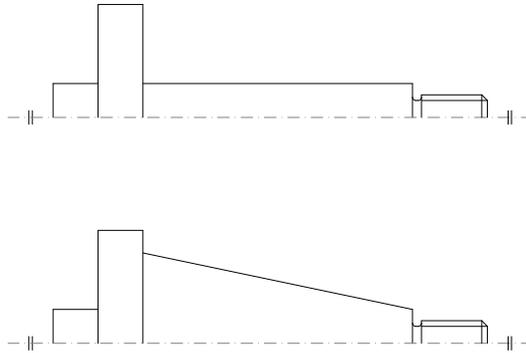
The long cylinder shape in the upper drawing can be quickly changed into a cone as shown in the lower drawing by moving the left reference point of the long horizontal line.
